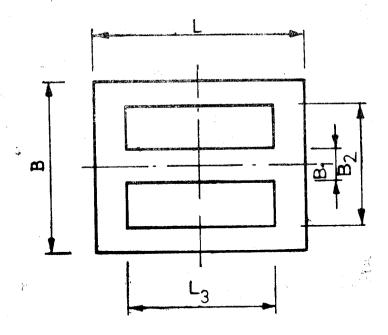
2-Recommended diagrammatic arrangement of openings and entry widths for the sizes 800 mm × 1200 mm, 1000 mm × 1200 mm (see Table 1.4)
